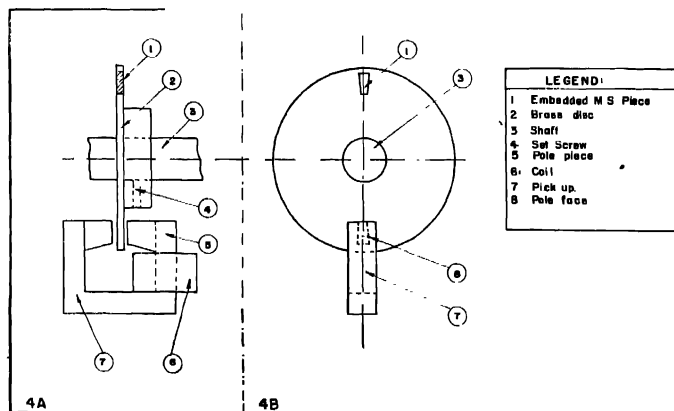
Modified design of disc and pick-up (A) Front elevation, (B) Side elevation
